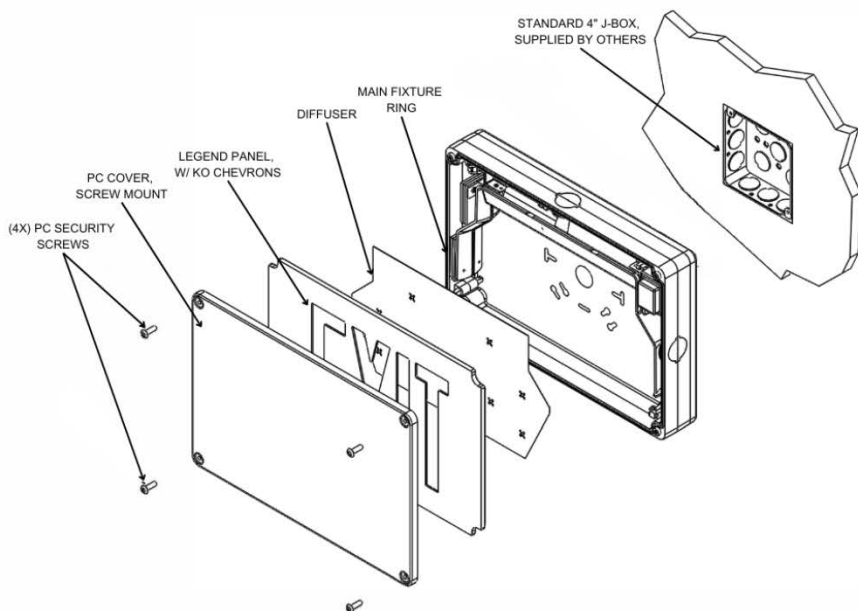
BACK/WALL MOUNT ASSEMBLY
